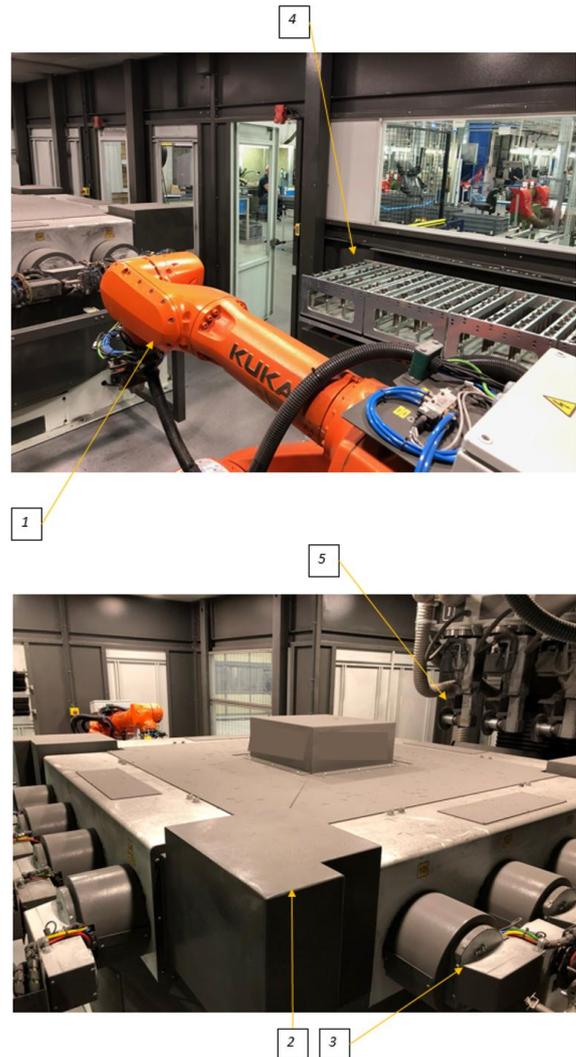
Work station (1 - industrial manipulator, 2 - rotary table, 3 - workpiece gripper, 4 - workpiece magazine, 5 - tool holder)
